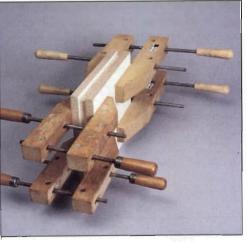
Photo F: Small pieces of veneer can be pressed between cauls using handscrew clamps.
